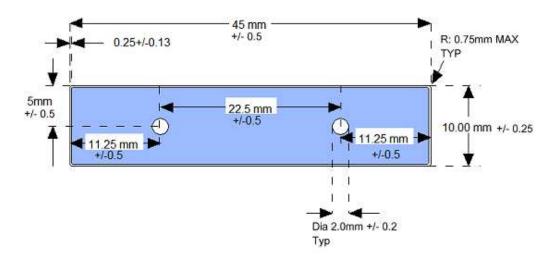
The figure shows the cross-sectional view and dimensions of a scintillator bar that will be used for the construction of the PCAL. According to FNAL, for an extrusion with this dimensions, the hole will be oval ranging in size 1.8 to 2mm by 2.5 to 2.8mm.
